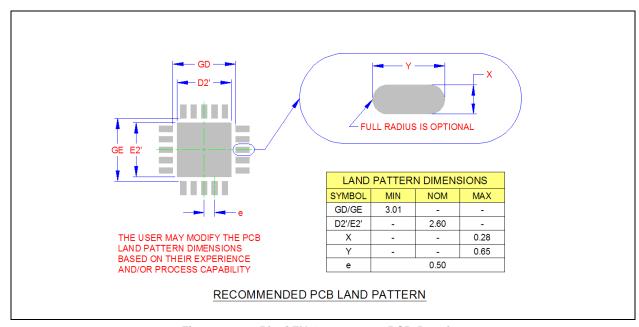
20-Pin QFN 4mm x 4mm PCB Drawing
